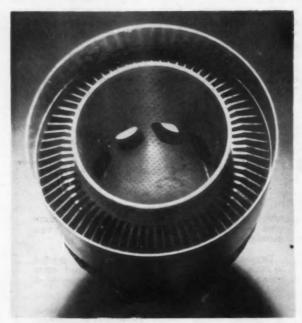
Cylinder of type shown in Fig. 3 was later "honey chromed," as shown above.
